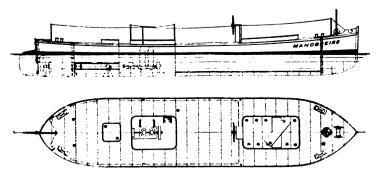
Plan of Single Screw Light Draft Motor Barge.
